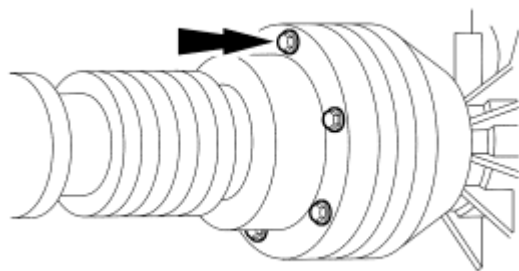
Identifying Driveshaft Cross Brace Mounting Bolts
